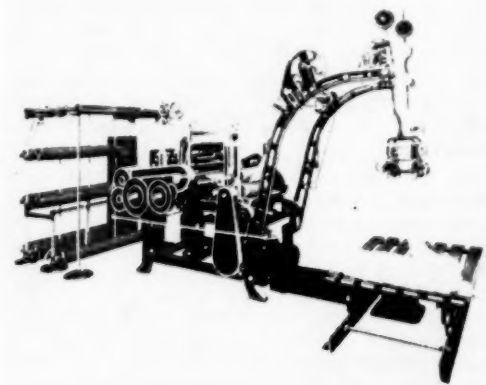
Mélange Printing Intersecting Gill with Feeding Arrangement
